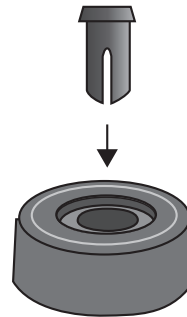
Inserting the Rivet Housing into the Bumper Foot
